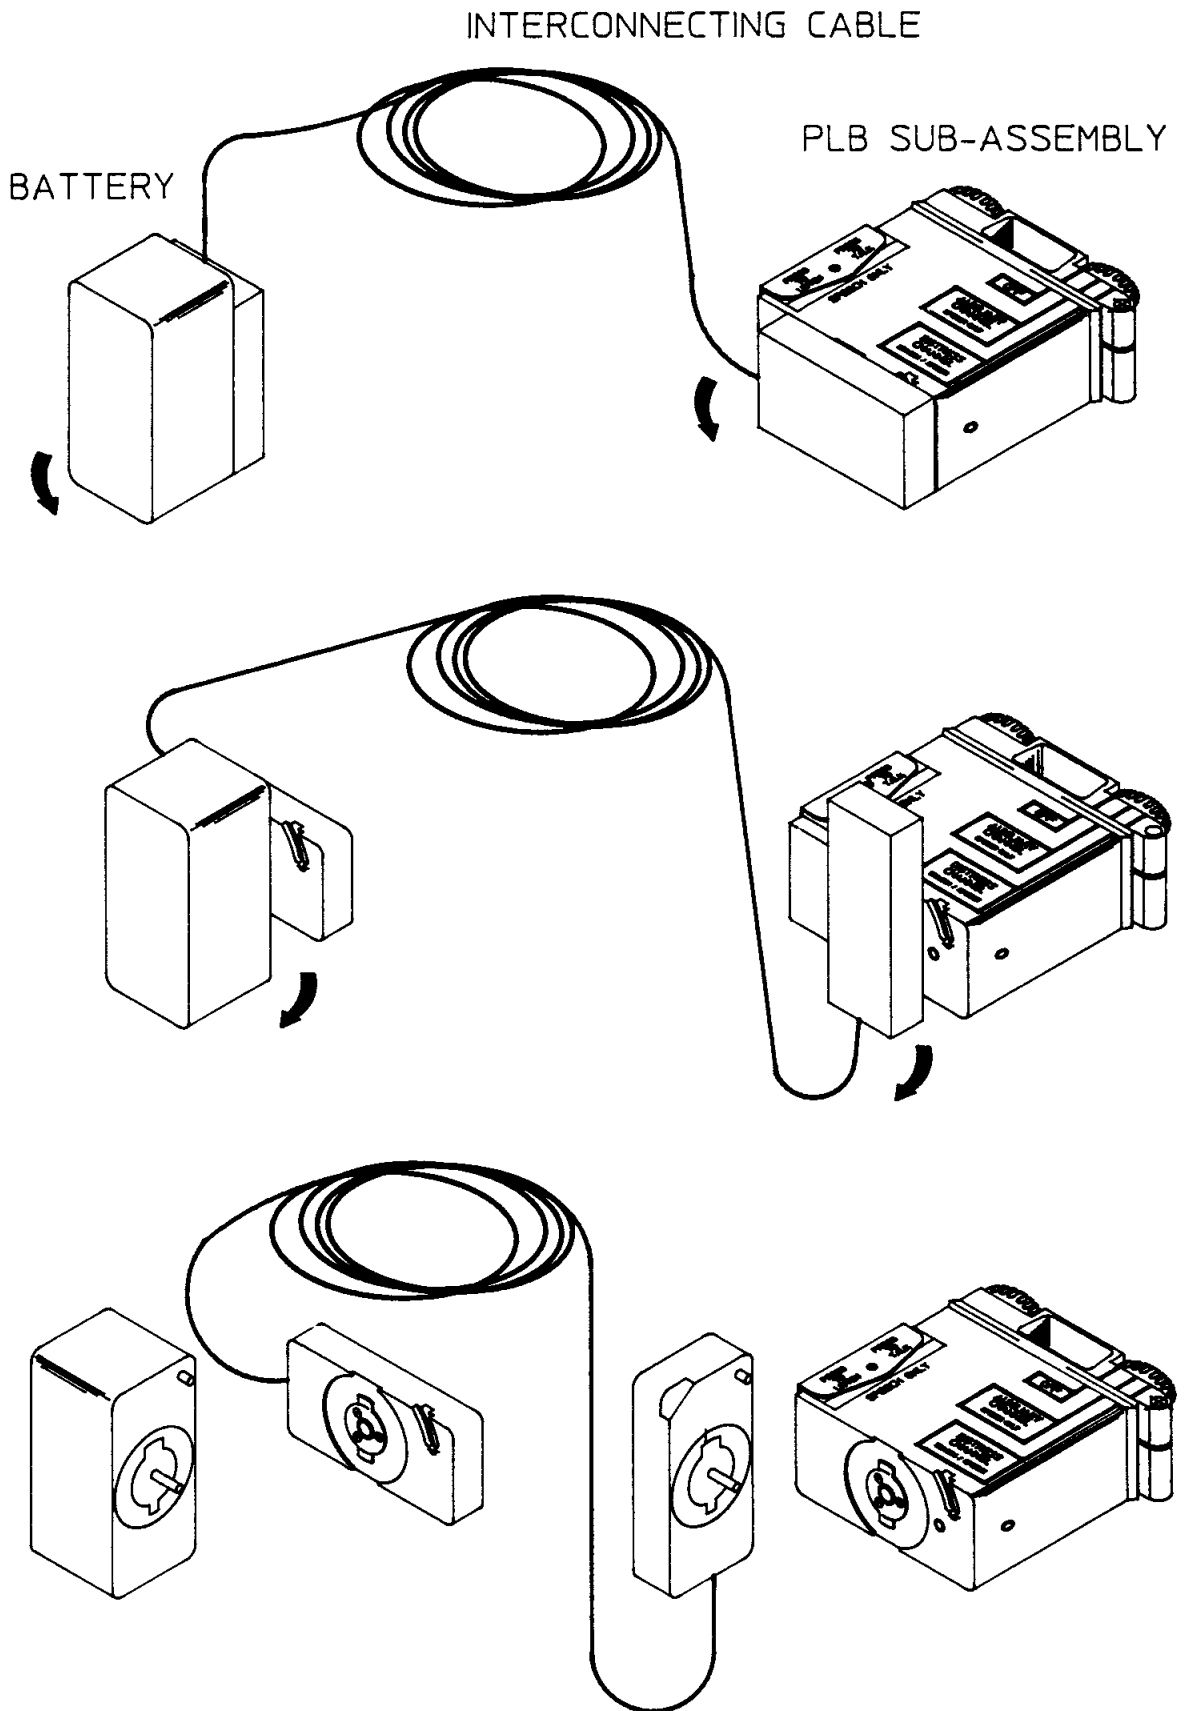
PERSONAL LOCATOR BEACON SUB-ASSEMBLY
